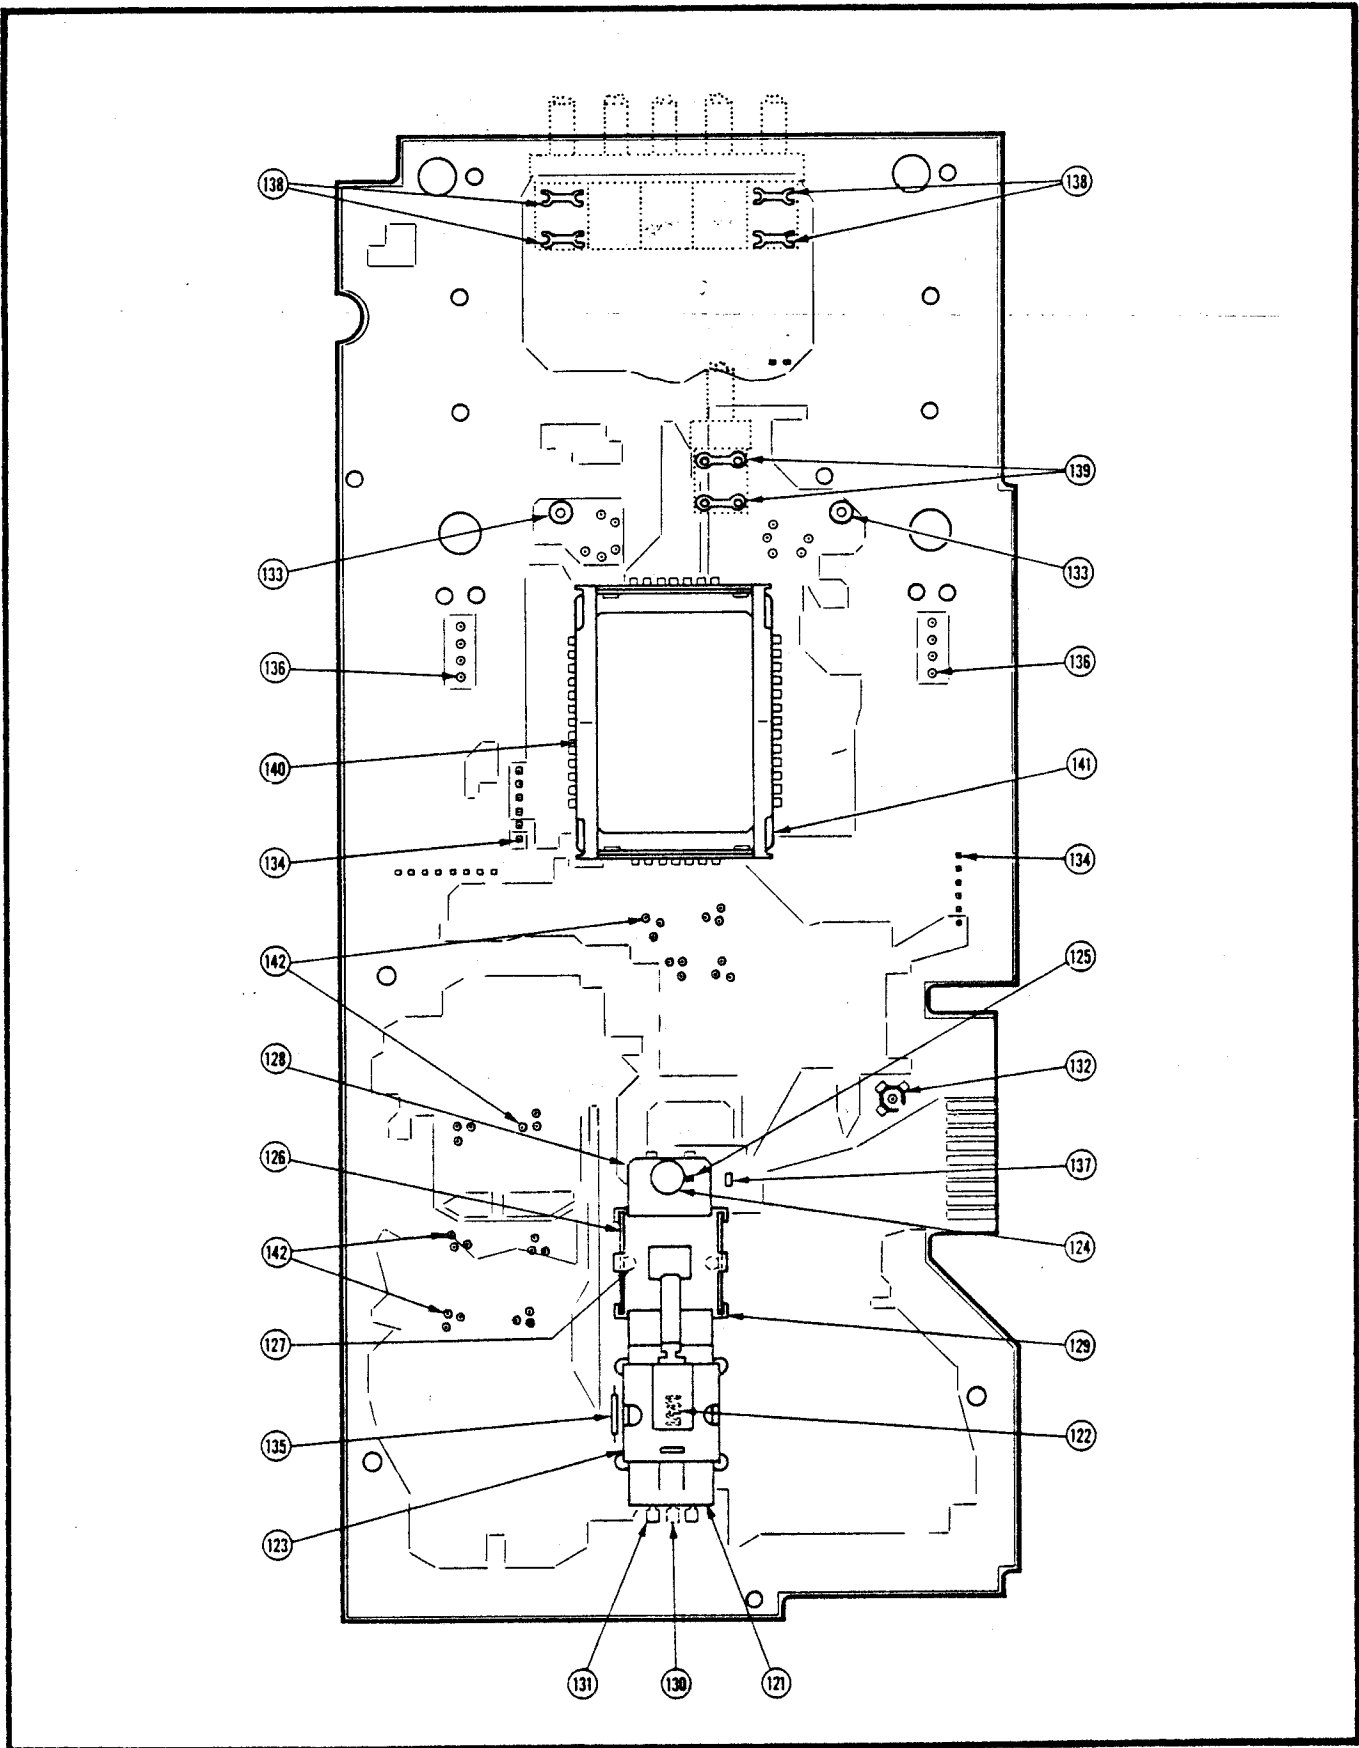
A5 Circuit Board Assembly, Vertical (sheet 4 of 4).
